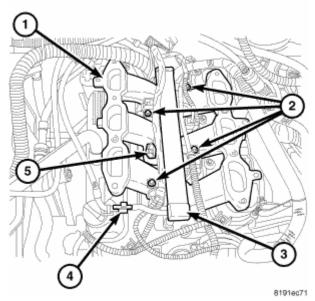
Fuel Rail 3.8L Courtesy of CHRYSLER LLC
